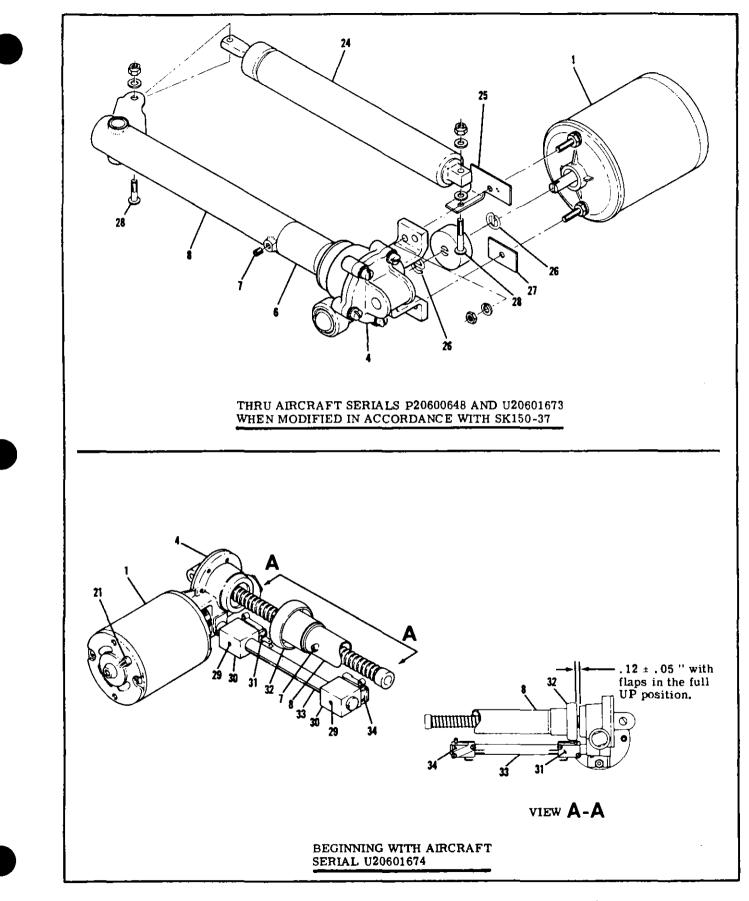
Flap Motor and Transmission Assembly (Sheet 2 of 3)
